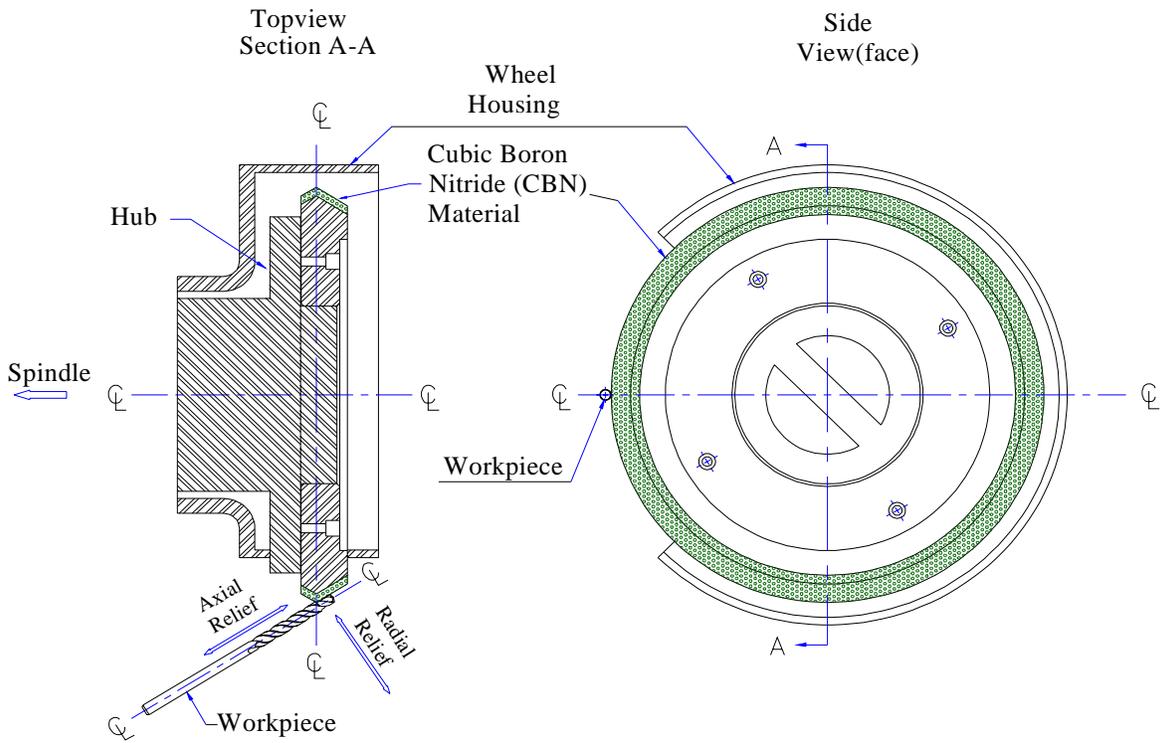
Workpiece and Wheel Configuration - Pilot Grinding Process for Step Drills
